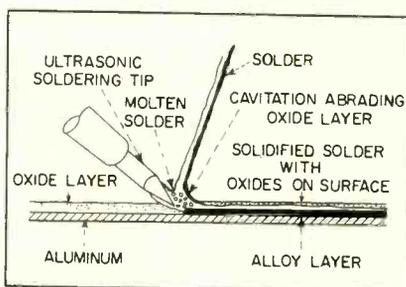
Diagrammatic views shows how the ultrasonically-driven tip removes the oxide layer from the metal and the molten solder forms an alloy layer on the surface of the aluminum. Excess solder, solidifying with oxide products on its surface, is removed and fresh solder is added if needed to provide a perfect bond
